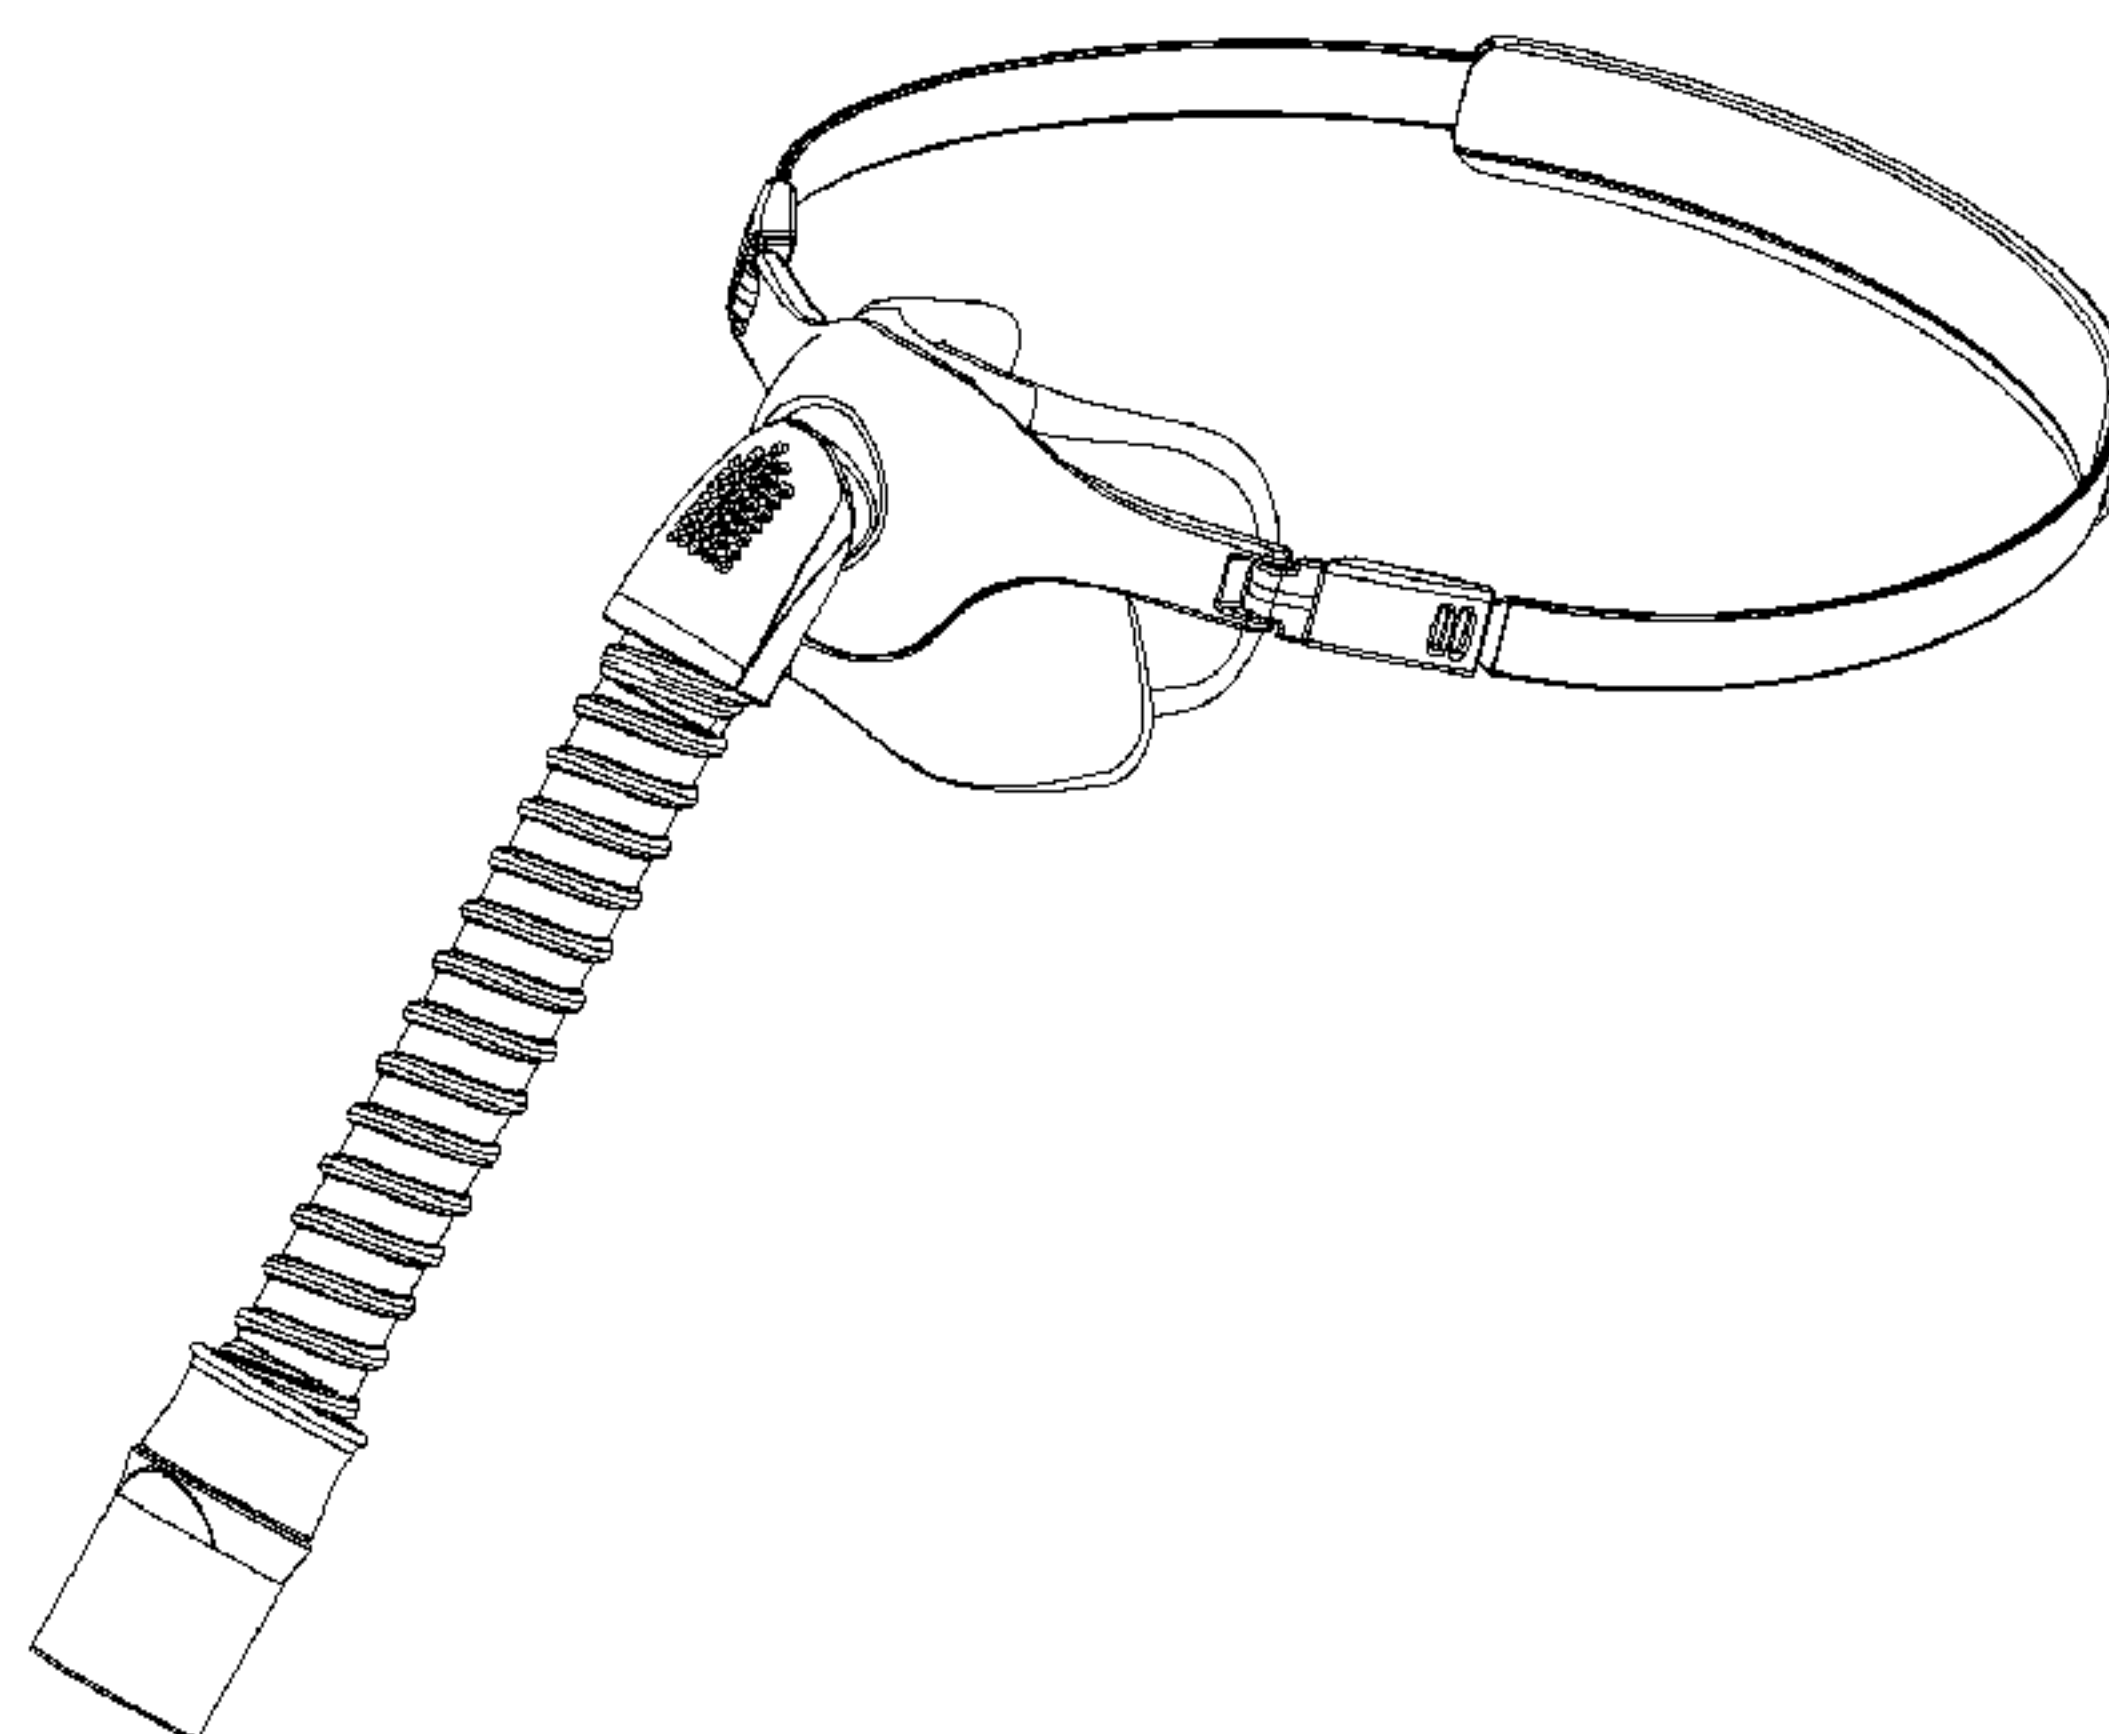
is a rear perspective view of the frame assembly of FIG. 15;
